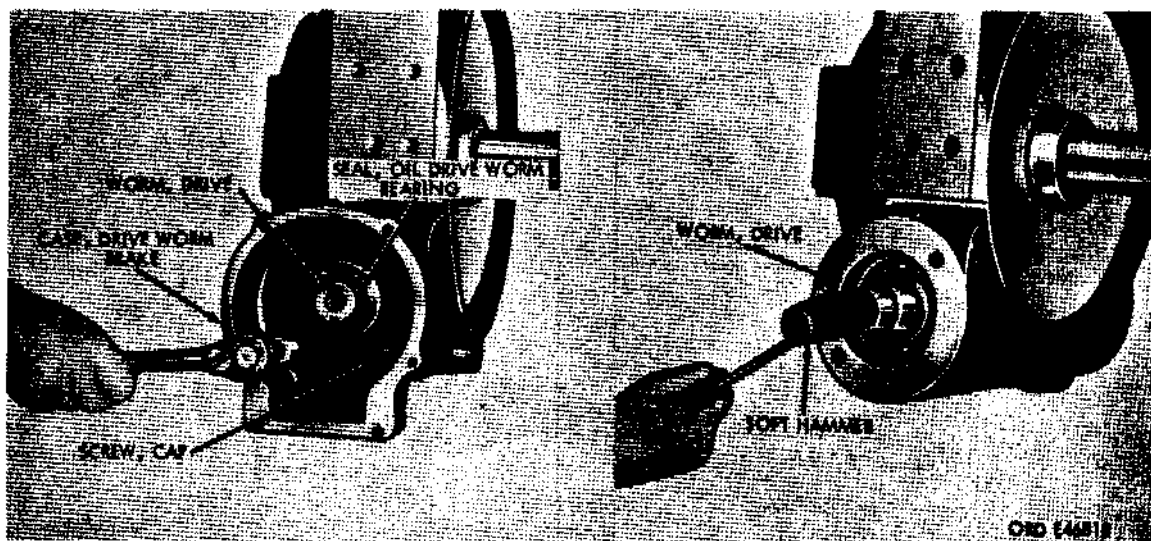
Removing drive worm brake case and freeing drive worm assembly
